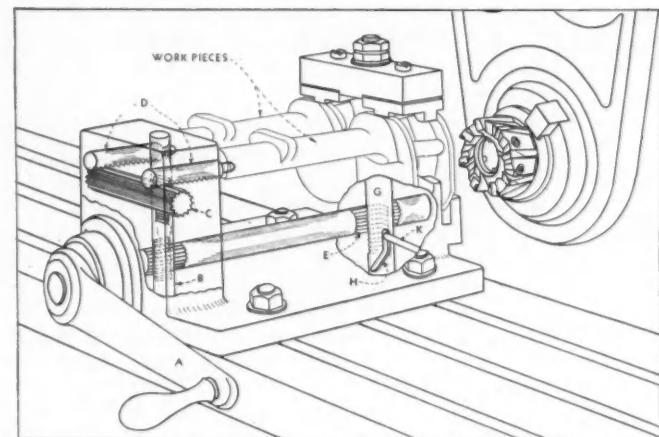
MILLING-FIXTURE FOR PUMP BODIES
